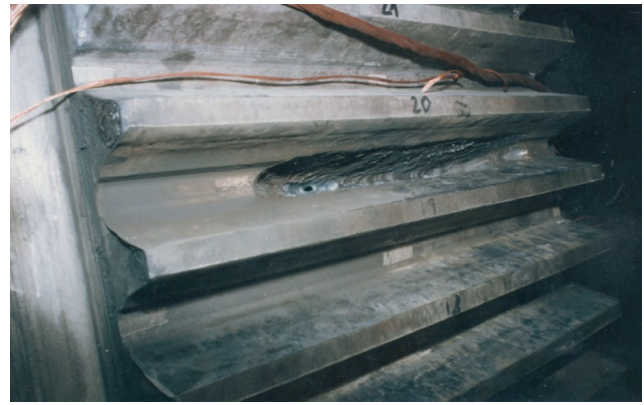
Cracks removal by arc-air grooving before repair welding and subsequent slow cooling
